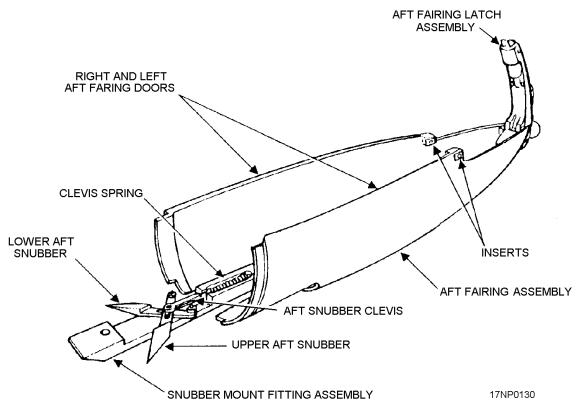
Aft snubber mount fitting assembly, aft fairing assembly, and aft fairing latch assembly.
